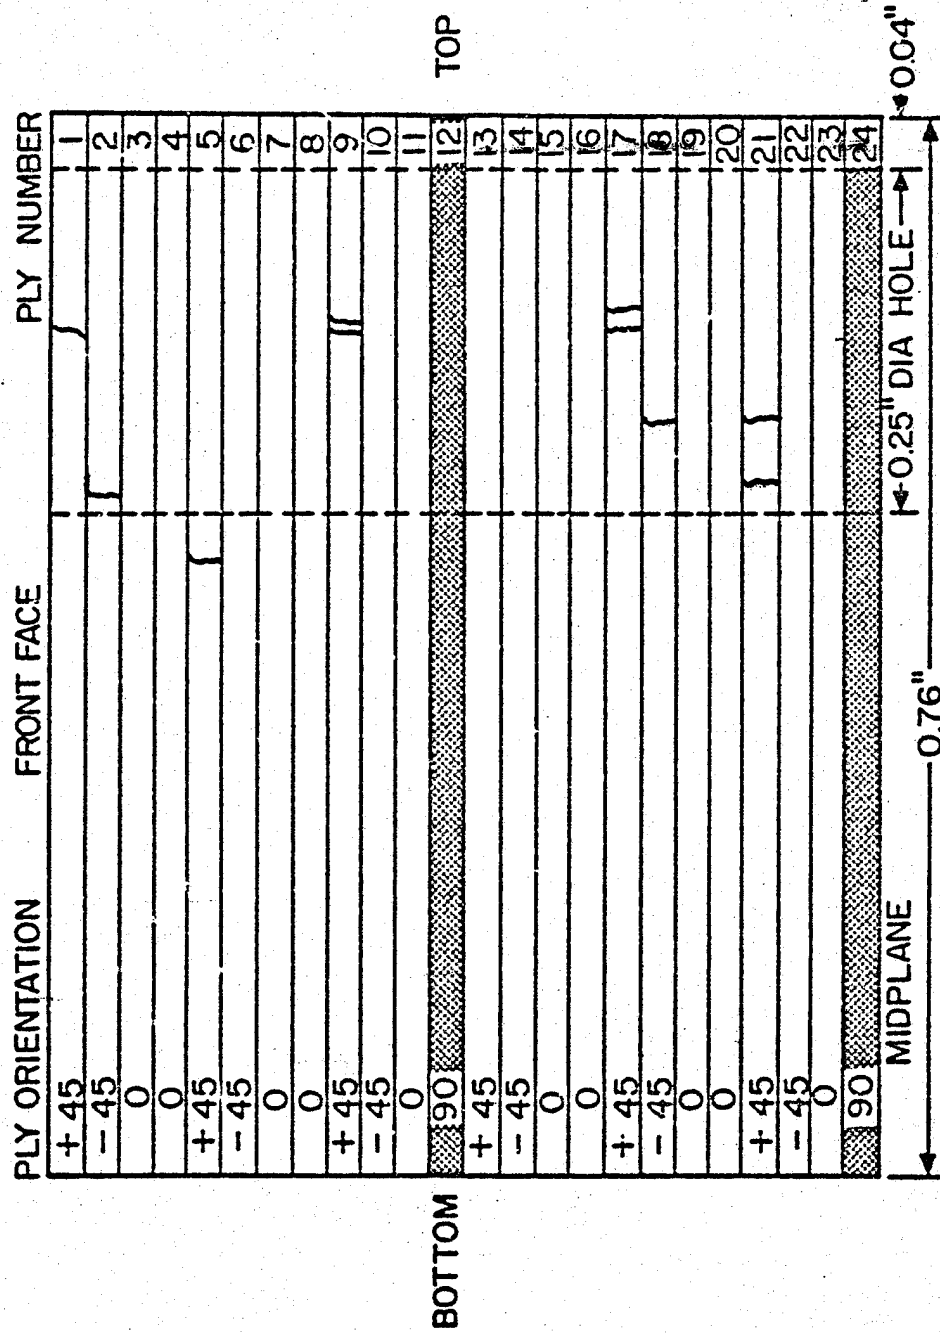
A. The fourth longitudinal section of specimen 1-6 (47 ply) showing damage detail (90 deg. plies have been highlighted for viewing ease).
